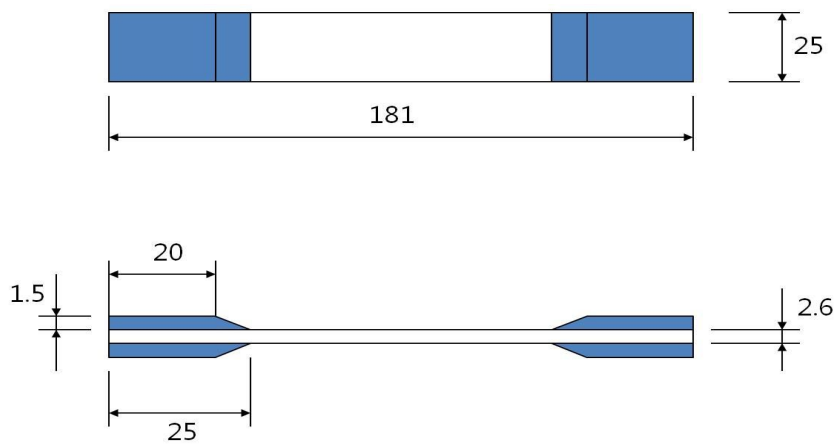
Dimension and Shape of Tension Specimen 90°
